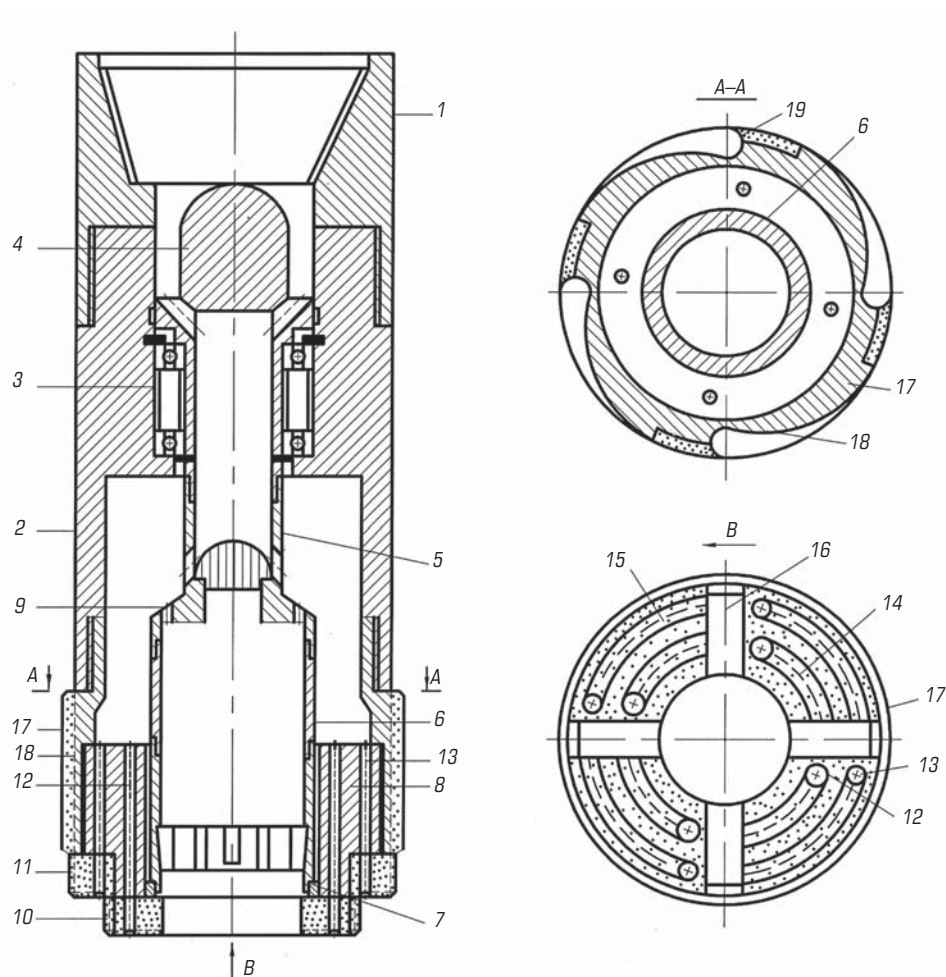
Bottom hole assembly of hydromechanical drilling with coring
